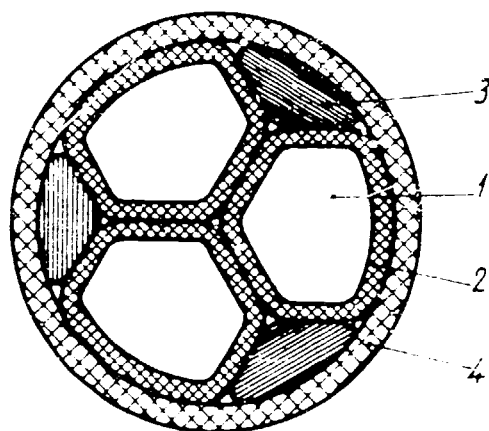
Section of 0.6/1 kV 3x70 - 3x240/240 mm² cable
